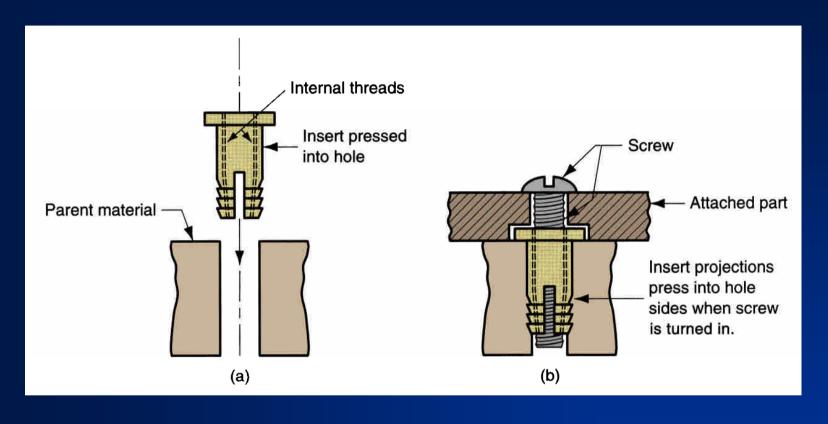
Screw thread inserts: (a) before insertion, and (b) after insertion into hole and screw is turned into insert
